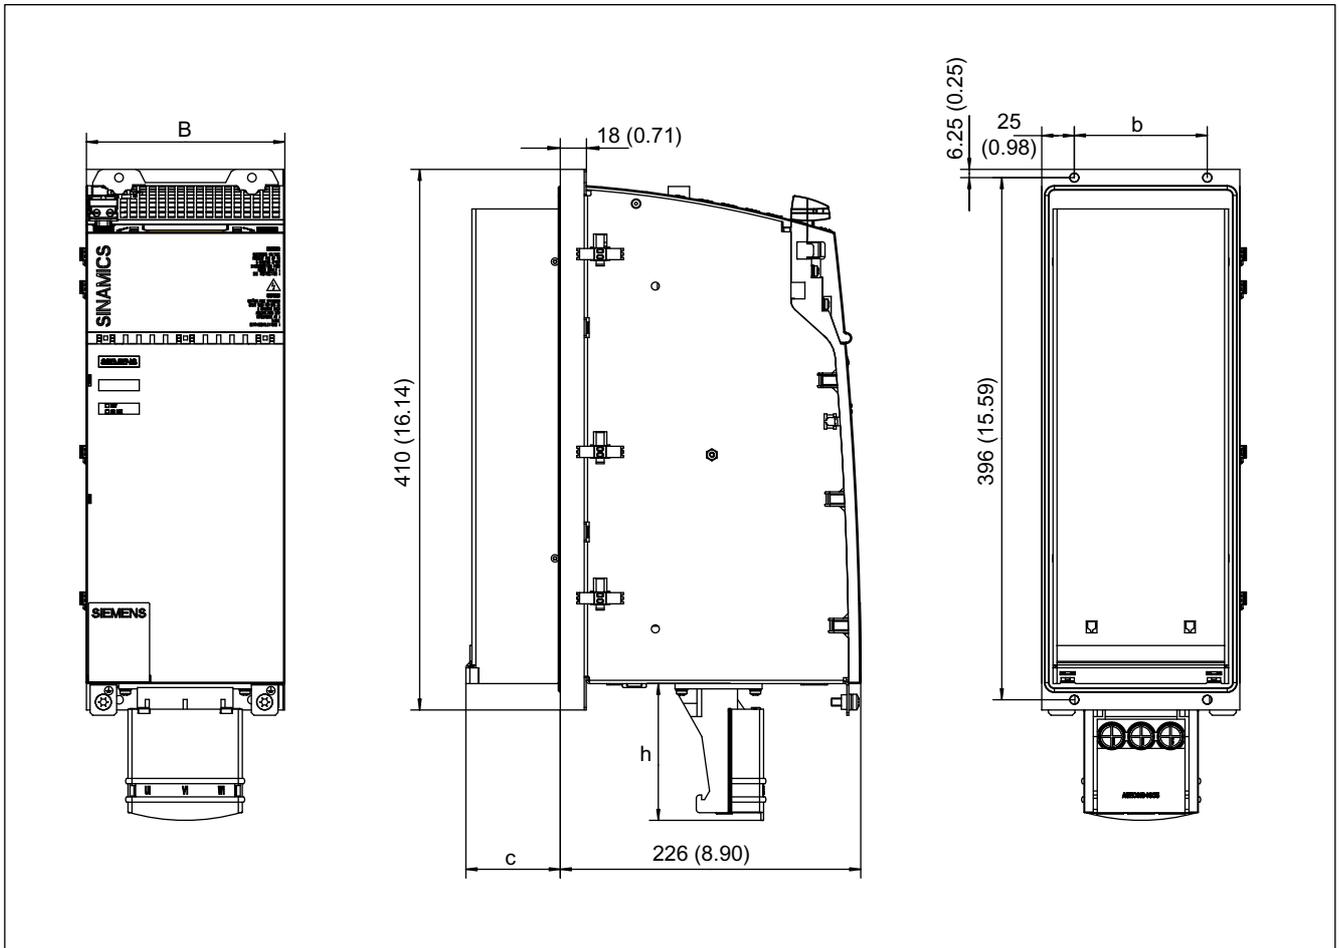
Dimension drawing of Active Line with external air cooling 36 kW, 55 kW, 80 kW, and 120 kW, all data in mm and (inches)
